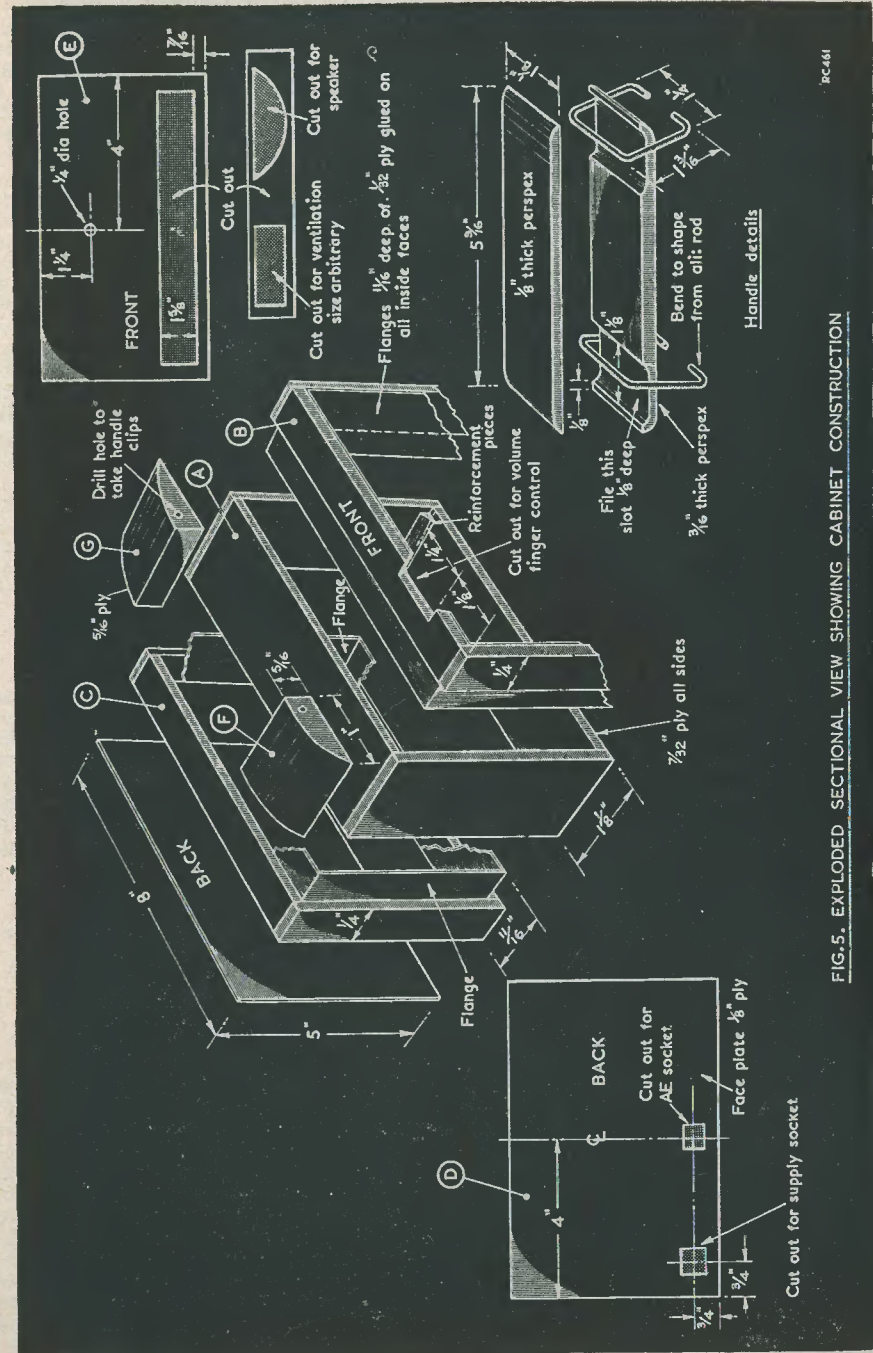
EXPLODED SECTIONAL VIEW SHOWING CABINET CONSTRUCTION
